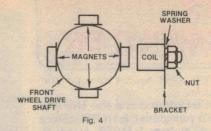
(left) shows how the magnetic pick-up sensor is installed in a rear-wheel drive car while Fig. 4 (above) shows the installation for a front-wheel drive car (see text).
